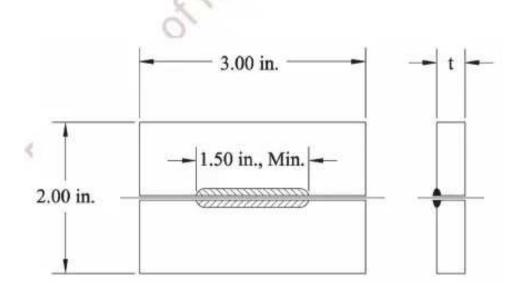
Longitudinal-Bead Underbead Cracking Test Specimen
